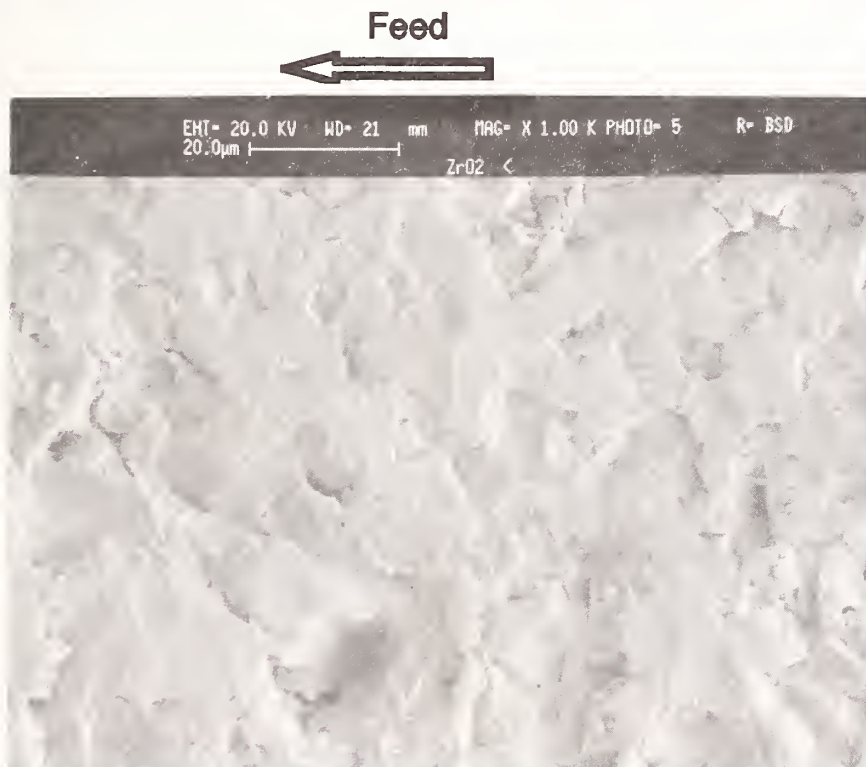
PSZ ultrasonic machined with impregnated diamonds (finish machining).
